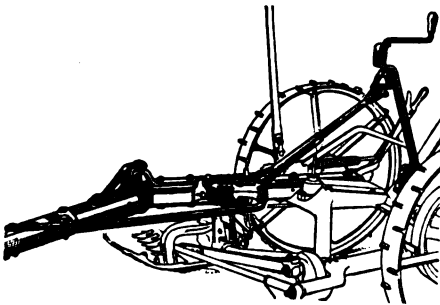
FRONT VIEW OF THE STEERING TONGUE TRACTOR HITCH SHOWING STEERING CRANK, WORM, GEAR AND PIVOT
